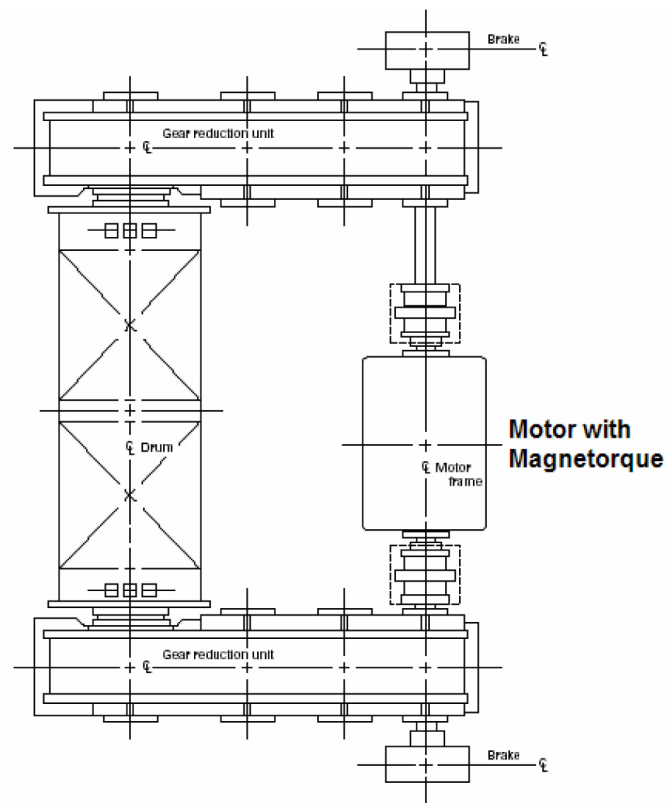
Drum, Gearbox and Brake Assembly Reference B2.2.2
